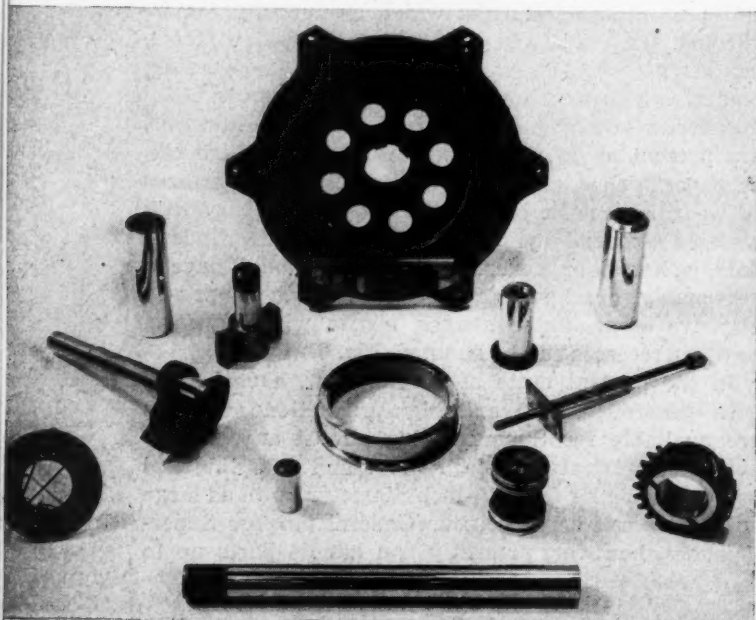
Above—Group of flat, grooved and recessed parts which have been Superfinished
